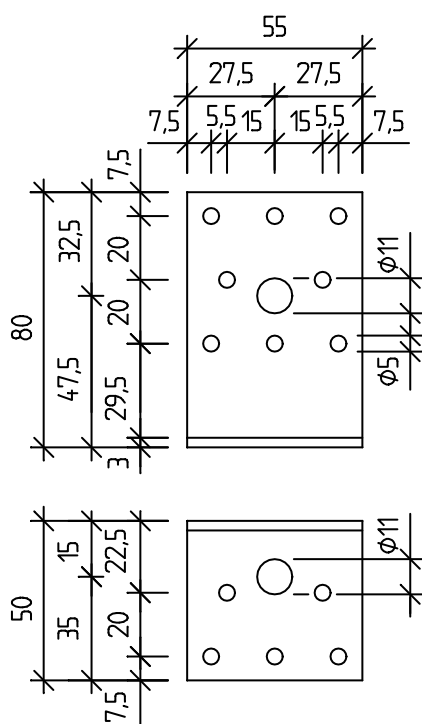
Dimensions of Angle Bracket type 7/80x50x3,0x55
